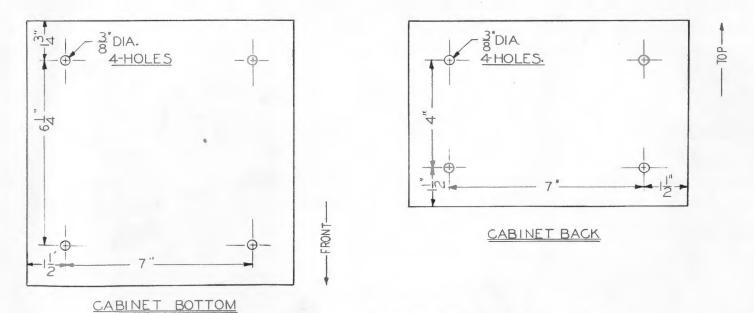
Adapter, Control MX-1743/SRC, Mounting Dimensions
